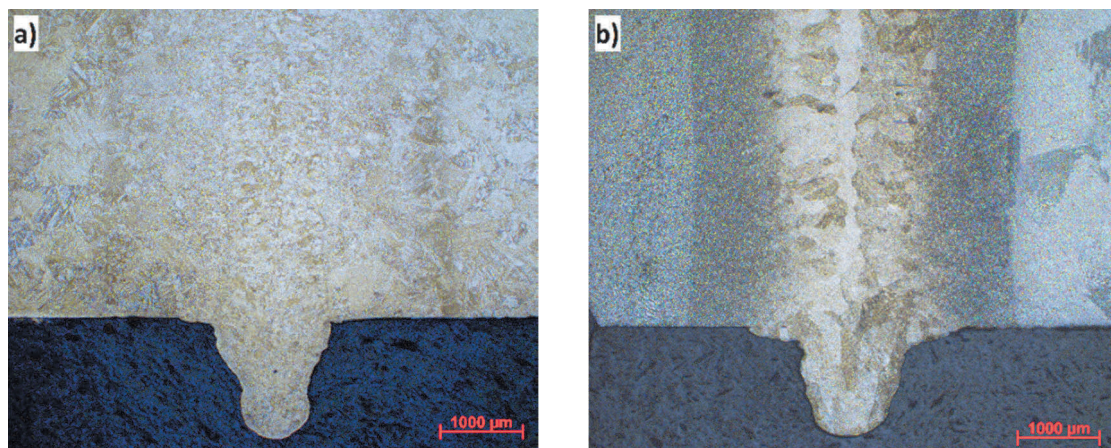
Root side of butt welds ($t = 20$ mm): a) sample S2 (height of projection 1.48 mm) and b) sample T2 (height of projection 1.33 mm)
